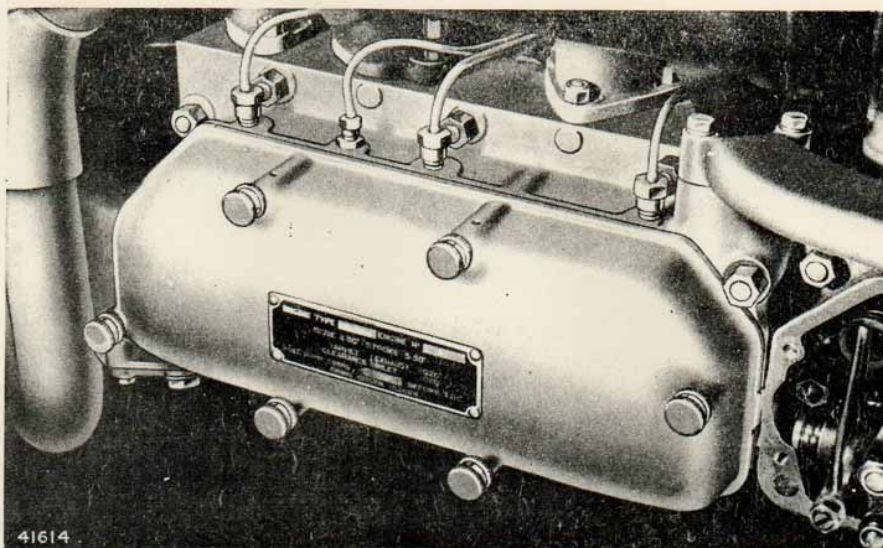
AIR BREATHER HOLES IN VALVE COVER BOSSES.
